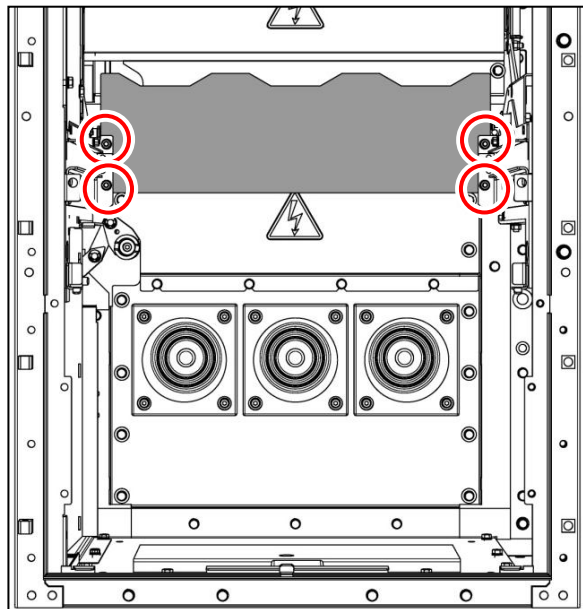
4 bolted joints on protection plate of switching-device compartment
